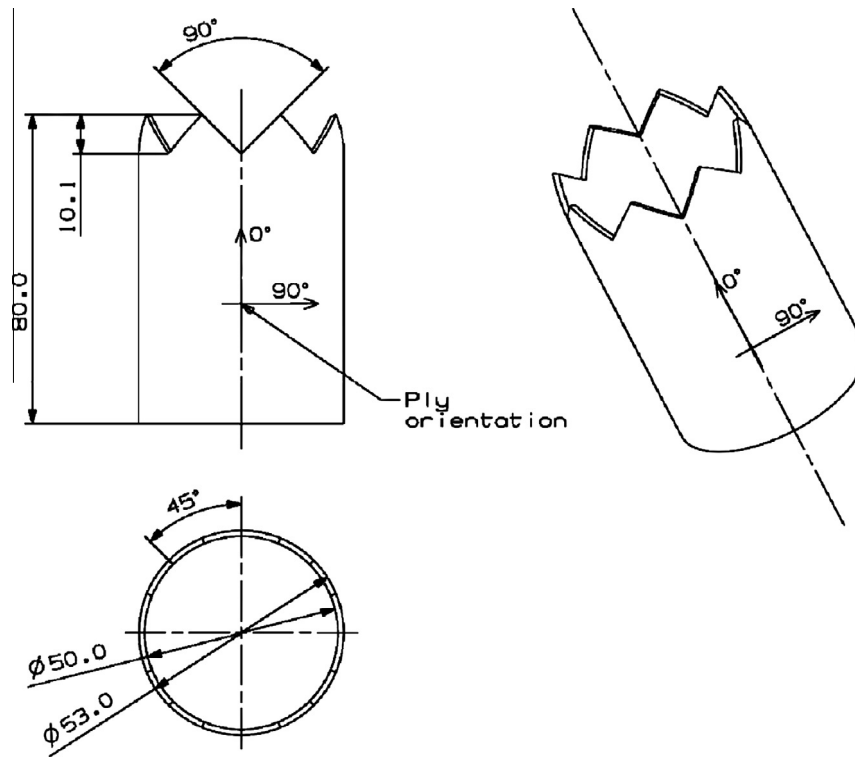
Test specimen: cylindrical tube topped with tulip triggers.
